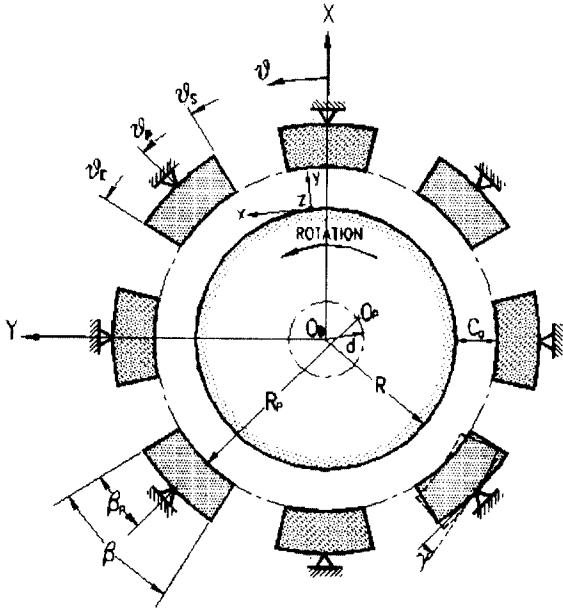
Geometry and coordinate system of a eight-pad guide bearing
